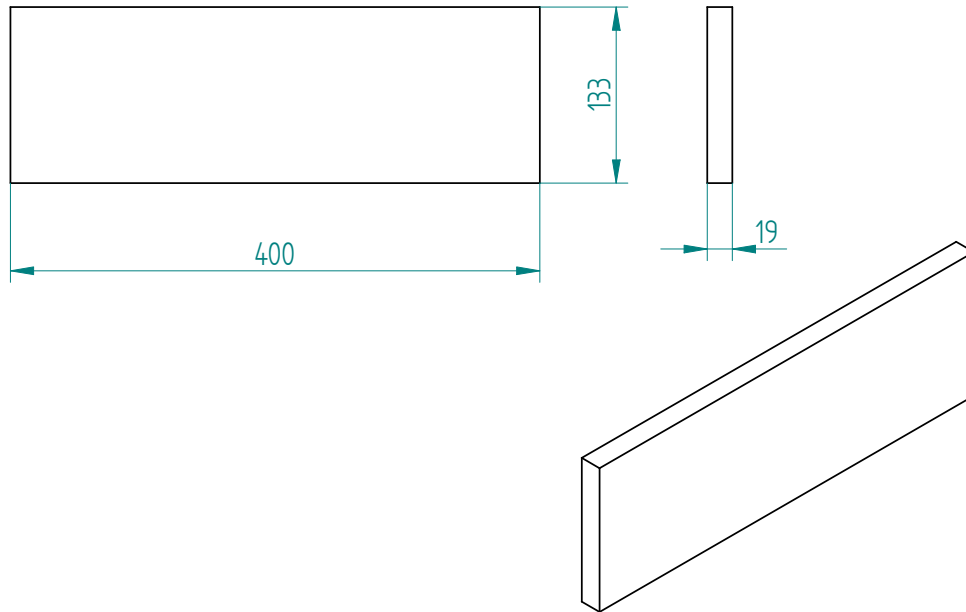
Shaped part : base for perpendicular tool
